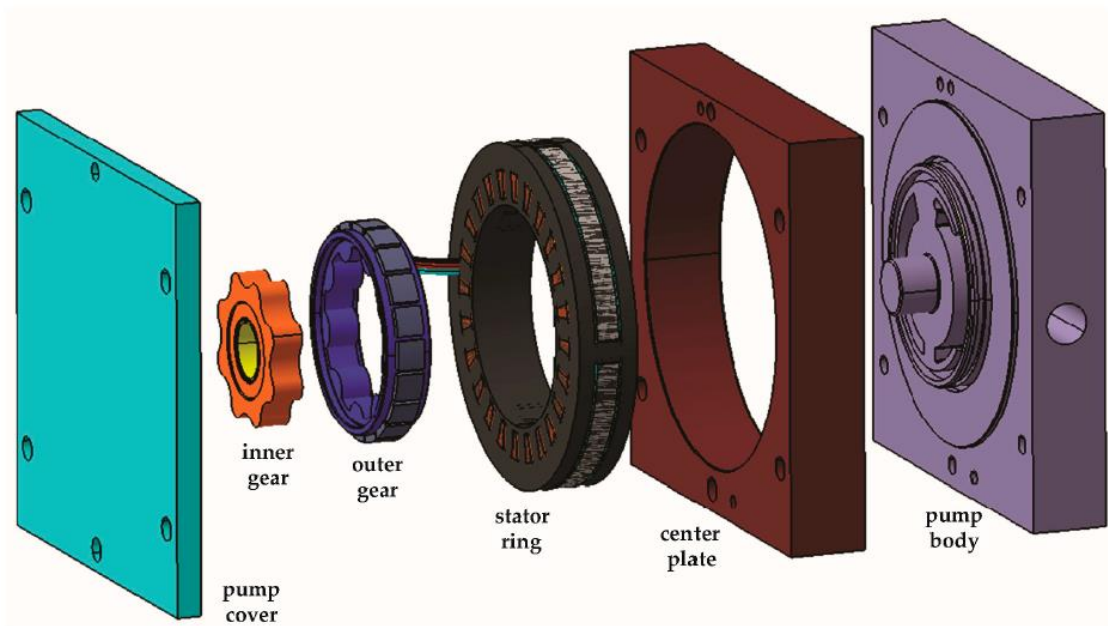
GEROMAG EXPLODED CAD VIEW [15]
